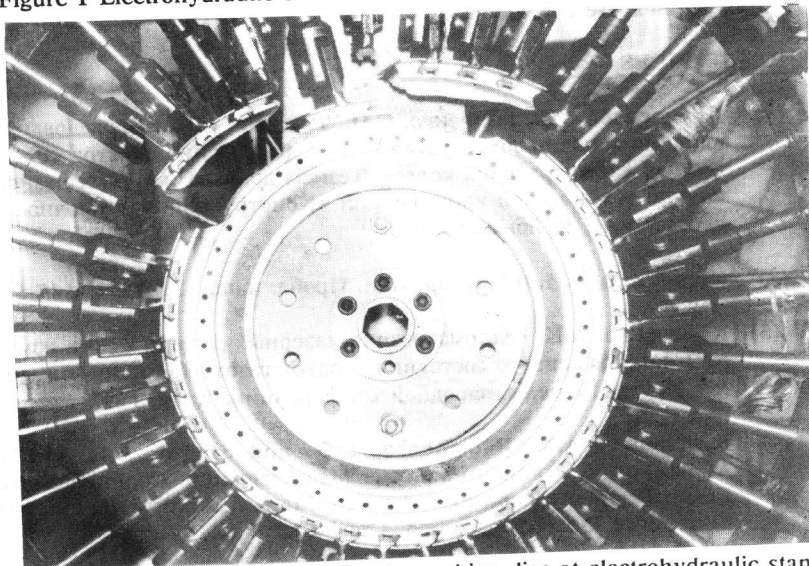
Low-cycle fracture of turbomachine disc at electrohydraulic stand
